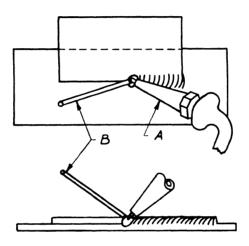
Setting up the metal for lap welding: A. It is important to fit the two pieces tightly together, C. Edge to be welded
